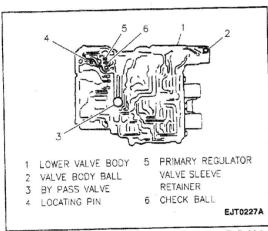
Bypass Valve, Valve Spring, Check Ball, Valve Damping Spring, Valve Body Ball and Ball Valve Spring Location
